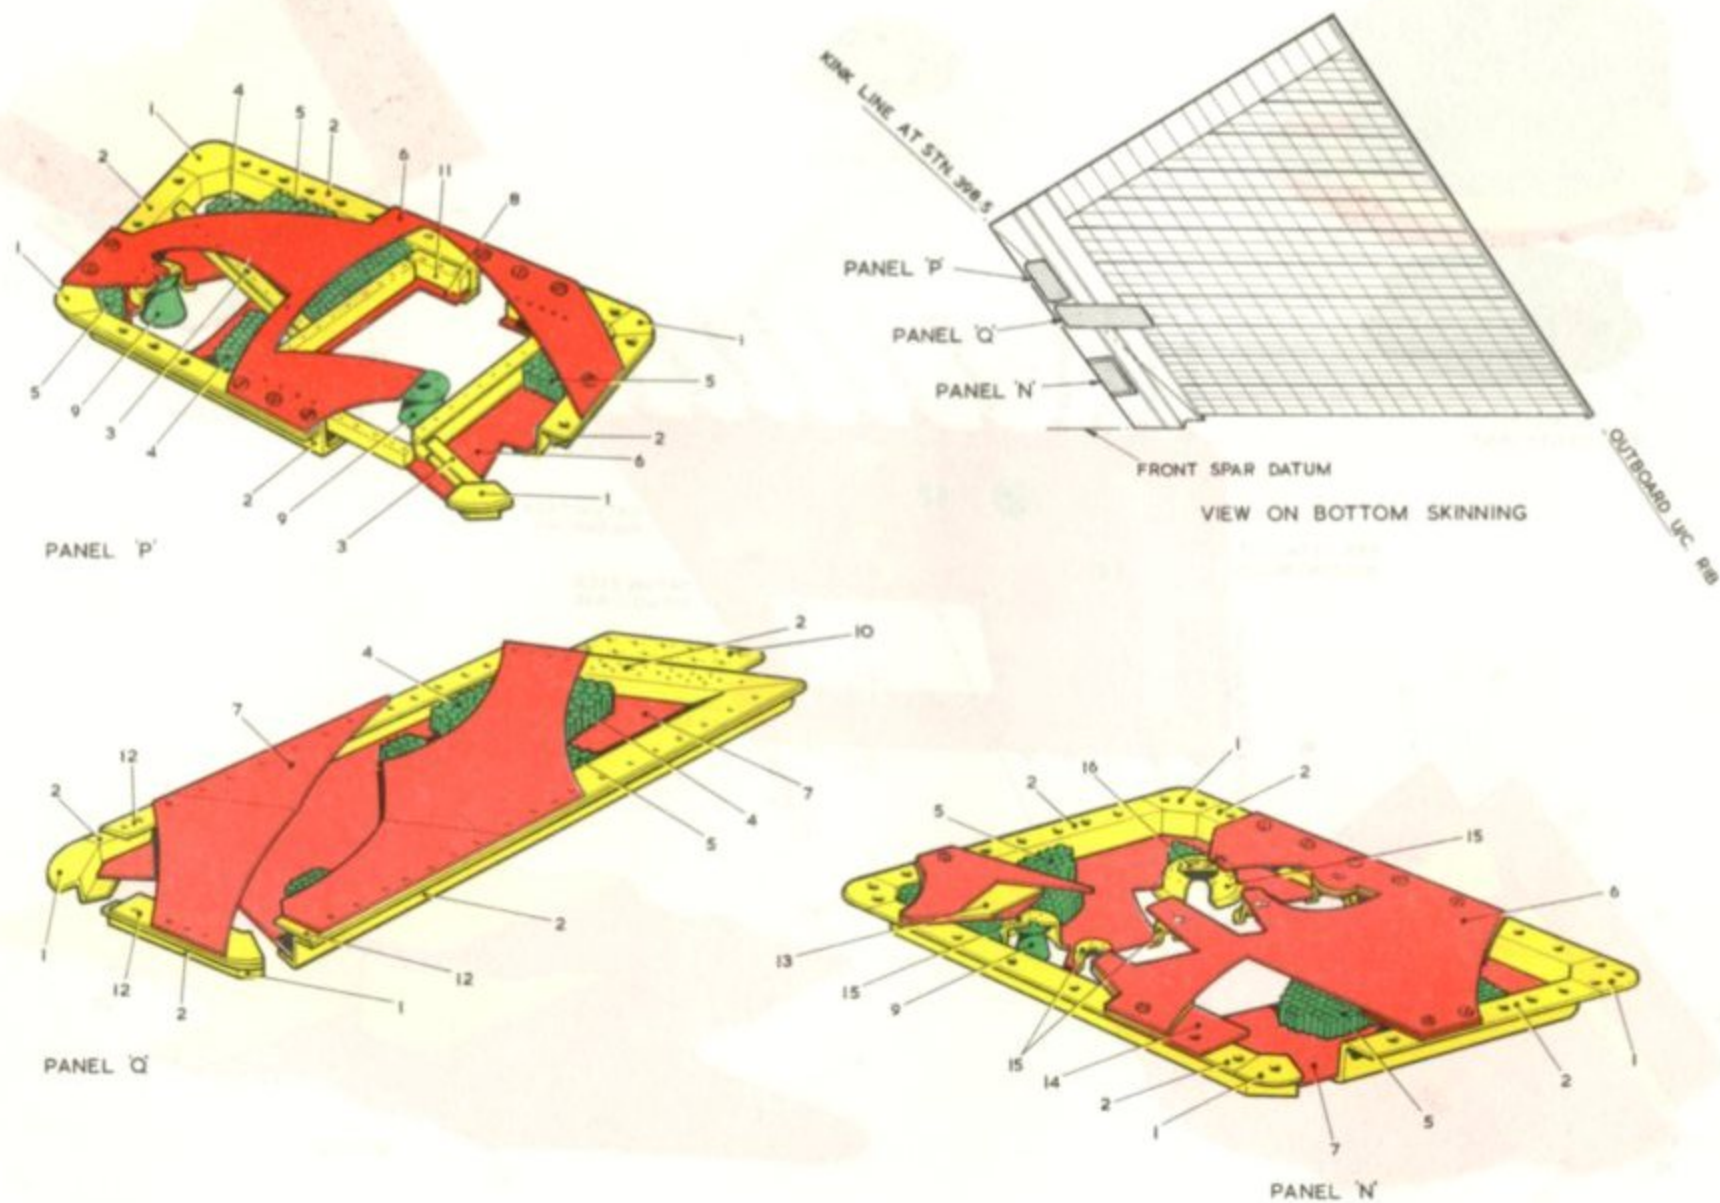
F. Wing skinning bottom surface kink control access panels (Mod. 1456)
